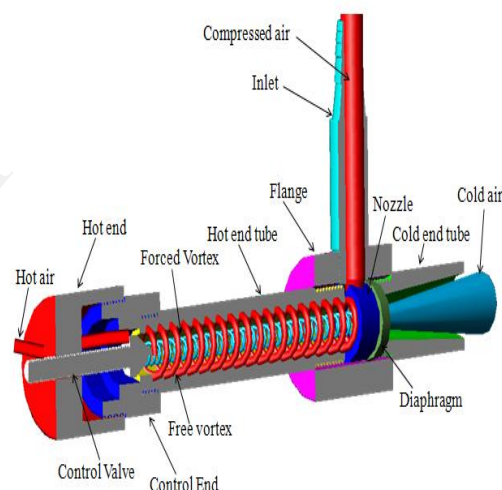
Sectional view of Vortex Tube.
